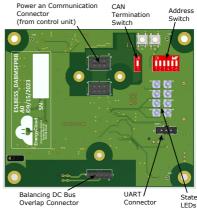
Printed circuit board of battery unit front panel (BOT side)
